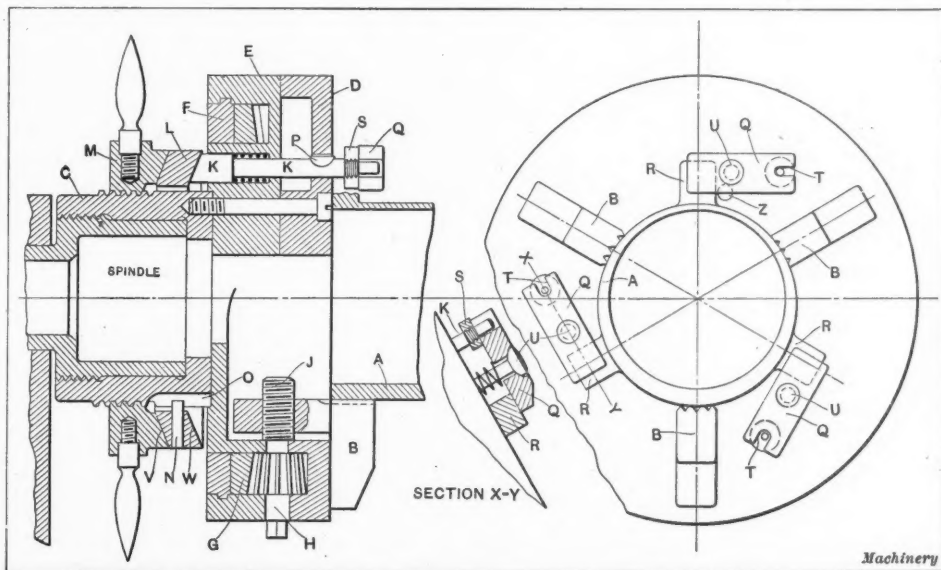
Combination Chucking and Clamping Device used in making Piston Rings
